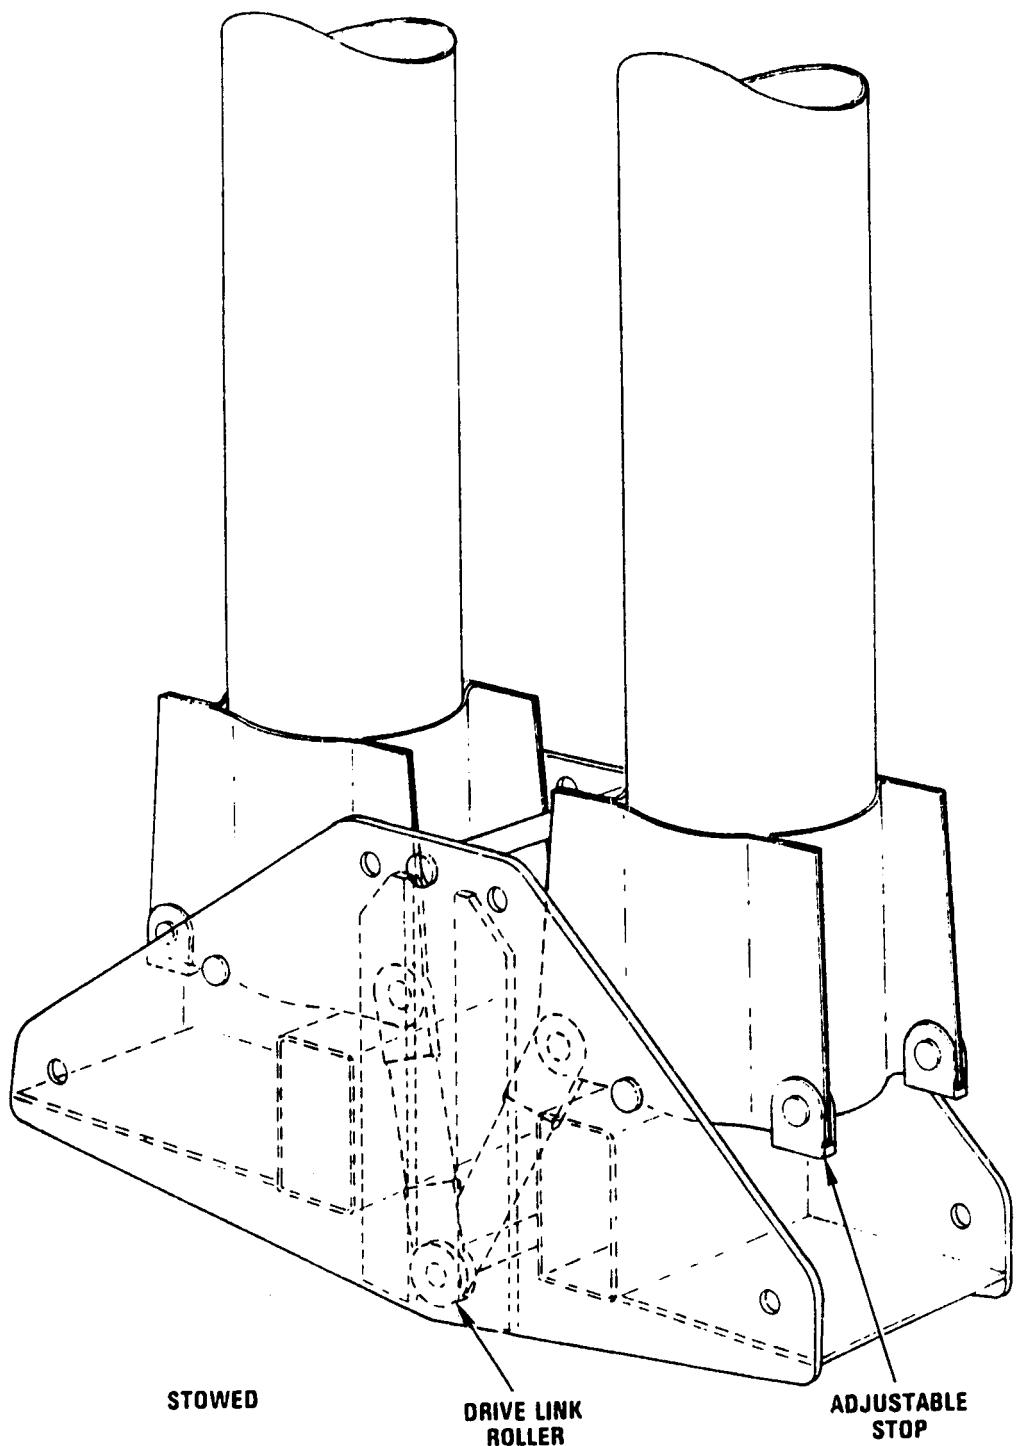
FRR - Stowed Antenna Assembly (Section)
